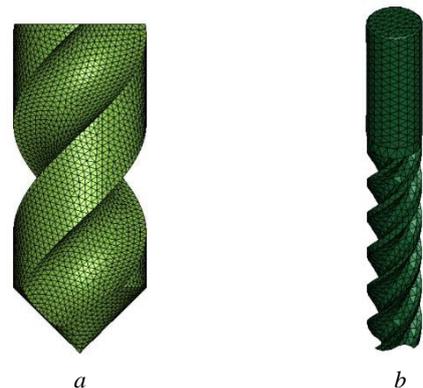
Finite element of drilling tool (a) and milling tool (b)
